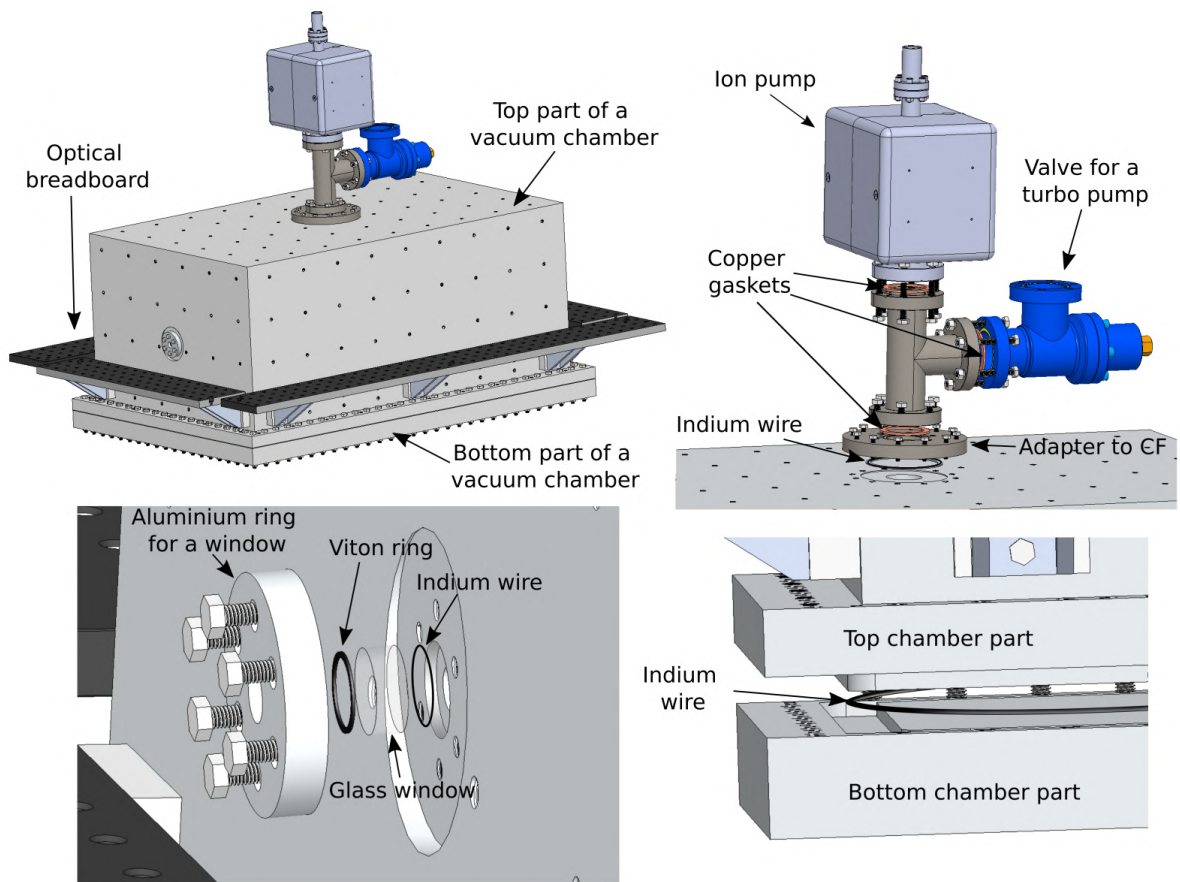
3D model of the vacuum chamber setup with an exploded view of the crucial elements necessary to achieve and sustain an ultra-high vacuum.
